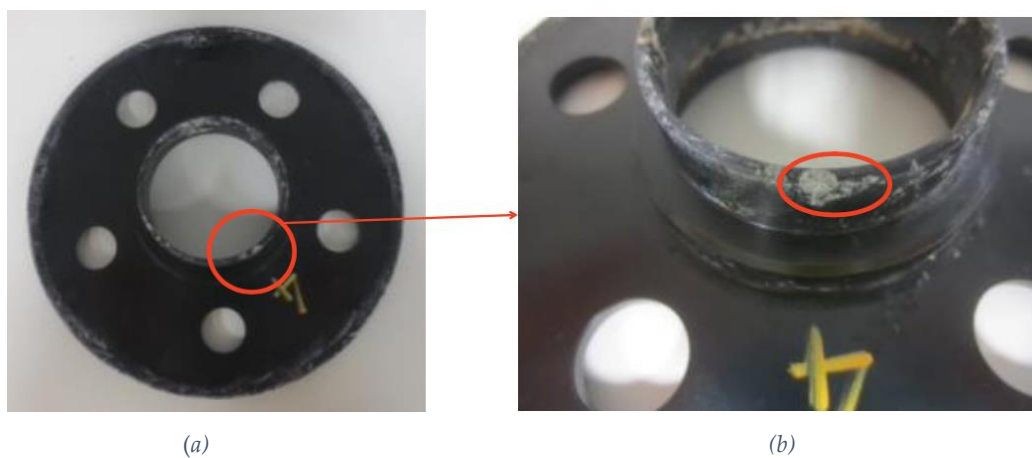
backplate after NSS test - side in contact with the moulded wheel: (a) global view, (b) detailed view of red circled area
